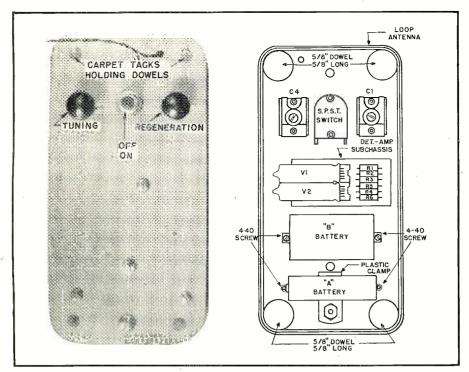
Front view of the receiver (left) showing location of the various controls. Mechanical drawing indicates how the various component parts should be placed.
